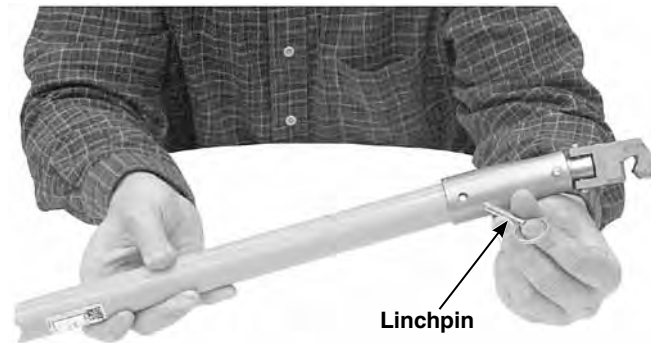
Remove the linchpin between the tool head and the insulating shaft.
